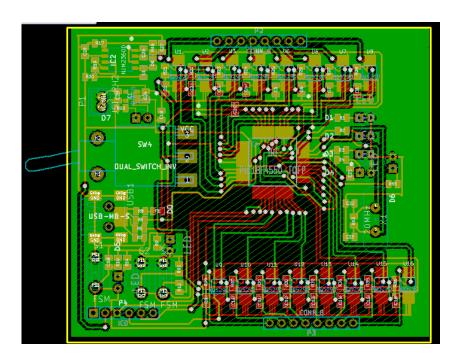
PCB Design Using Microcontroller PIC18F4550
